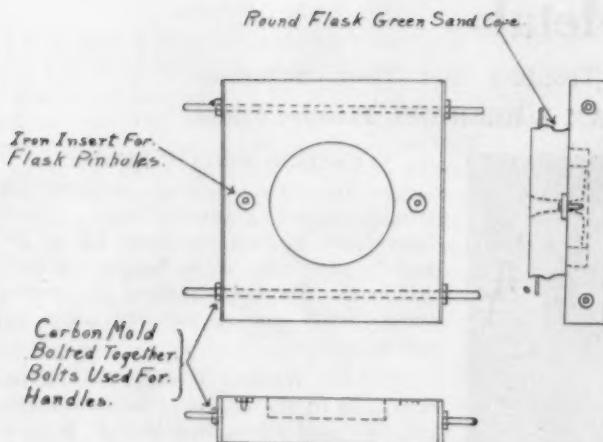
CAREON MOLD FOR BRONZE GEAR BLANKS
